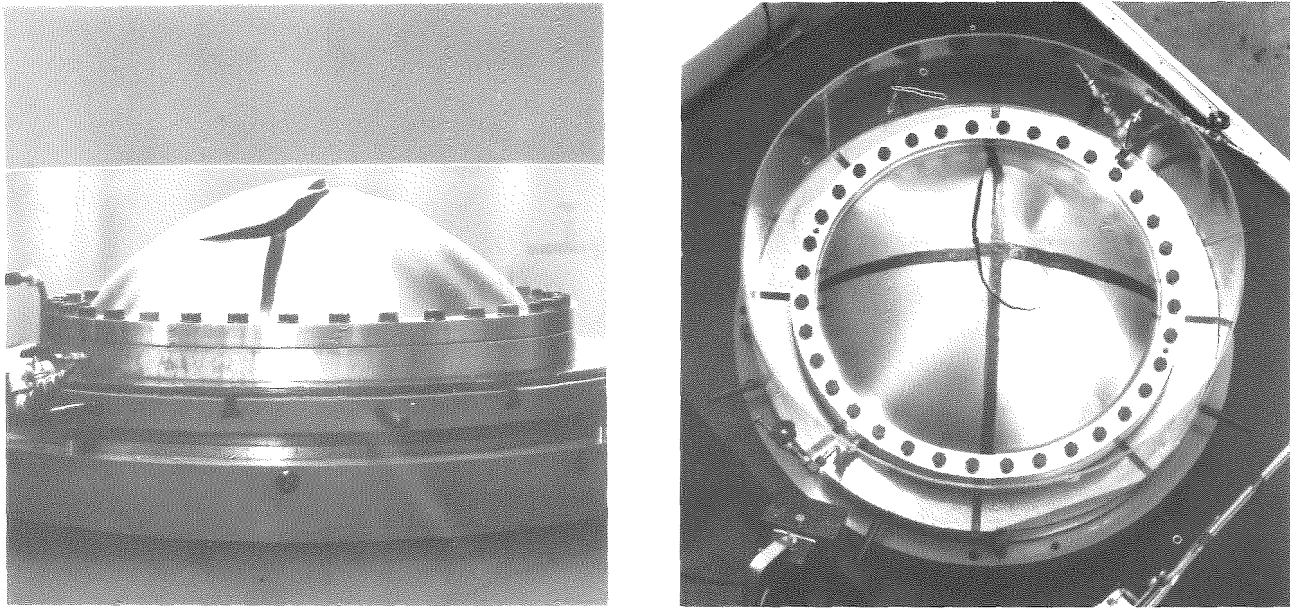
Membrane without reinforcement after failure at a pressure of 42.8 bar.
